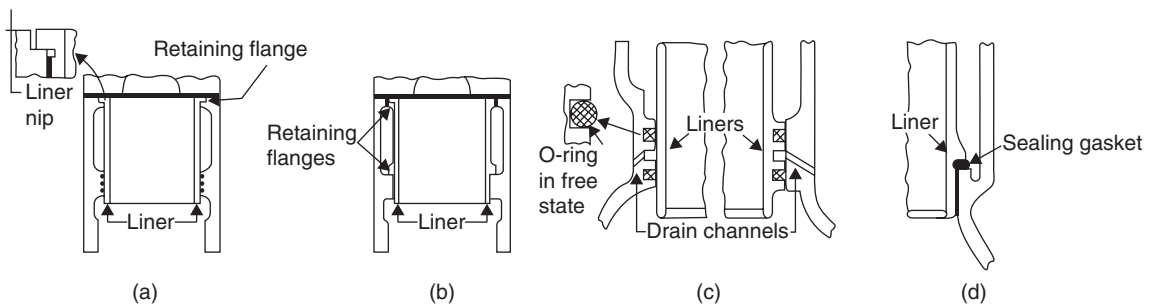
Wet cylinder liners in (a) closed-deck and (b) open-deck cylinder blocks. Sealing arrangements for (c) suspended wet liners and (d) wet liner held in compression
